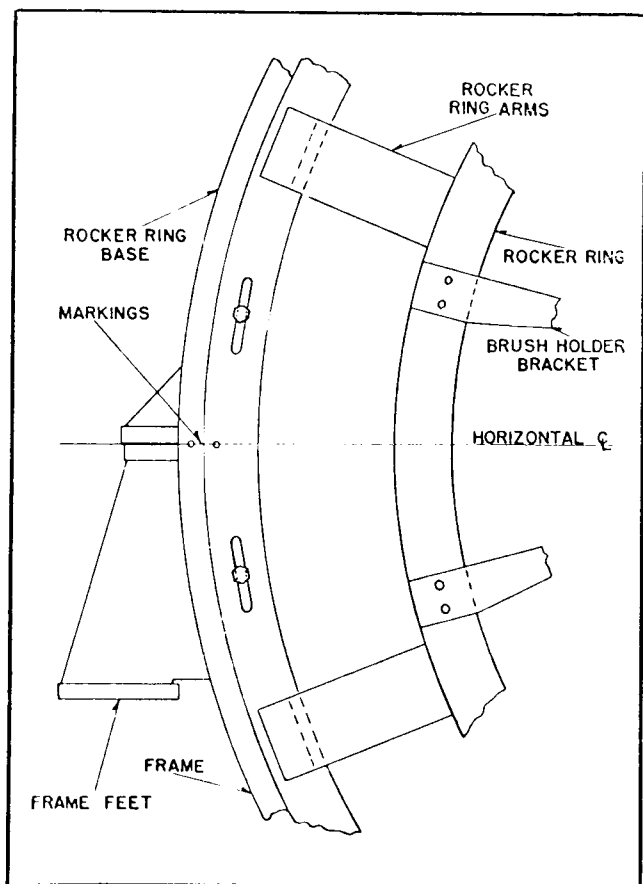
Locating Brush Position by Rocker-Ring Base and Frame Markings on Large Reversing Type D-C Mill Motors
